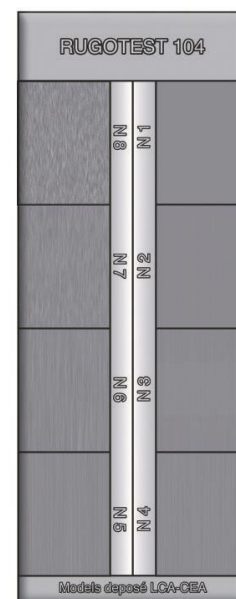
TESA Rugotest 104 specimen – flat grinding [16]
